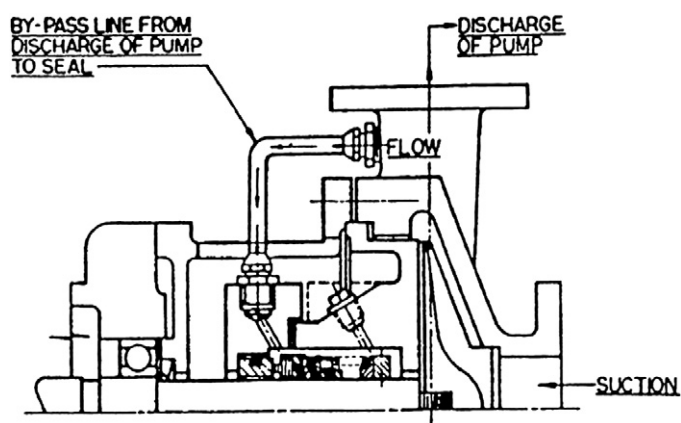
• Liquid seal flush (Courtesy of John Crane Co.)
